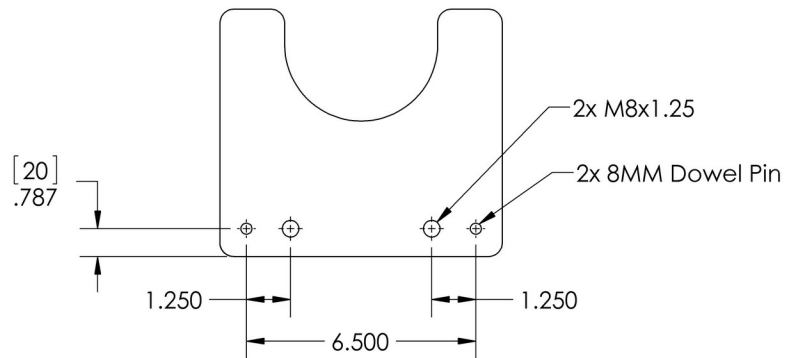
RI-90 Pivot Fork Hole Pattern Dimensions
